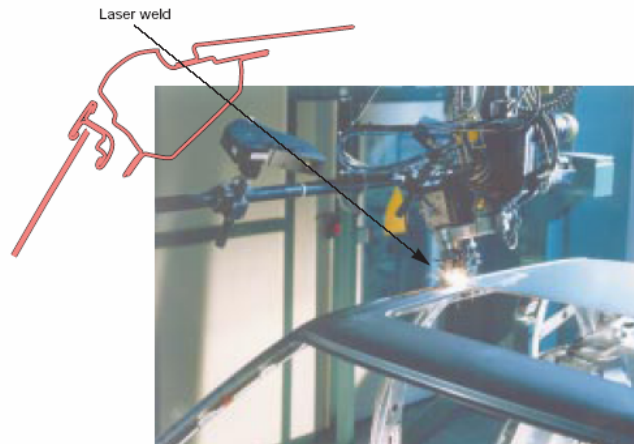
Typical joint geometry for roof laser welding. (Source: Larsson, 1999)
